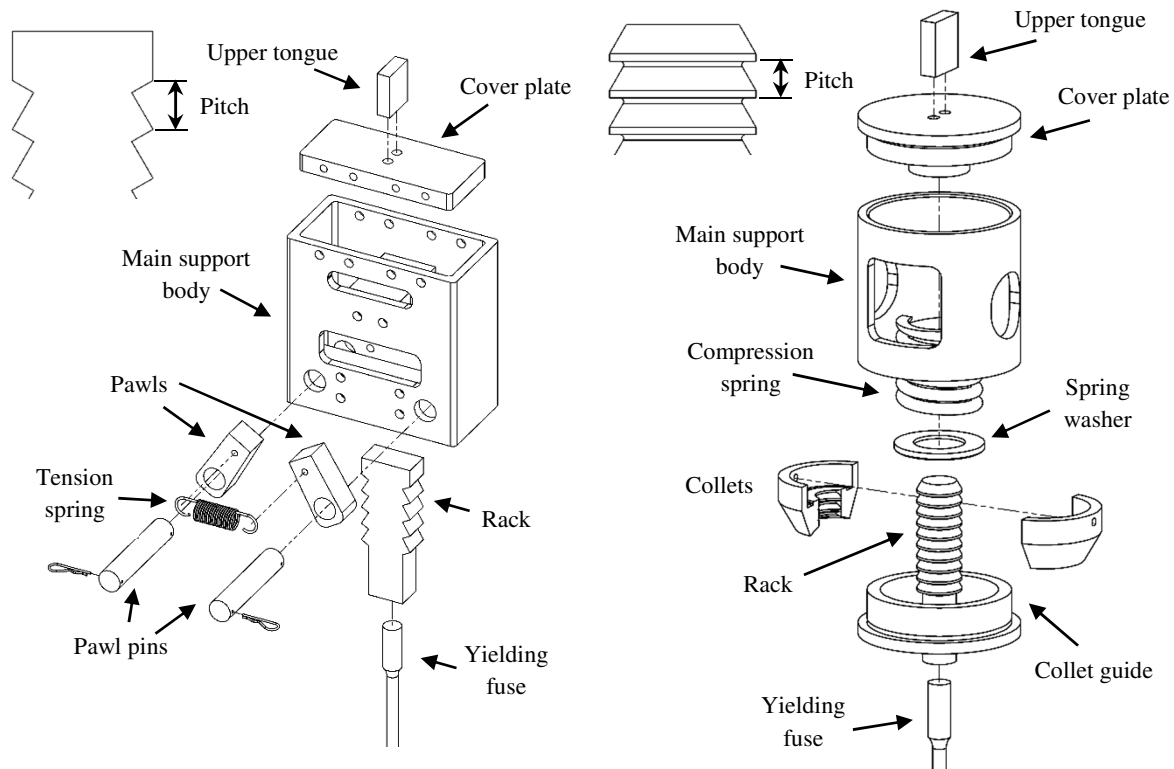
First, linear ratchet mechanism assembly. Pitch dimension shown in insert.
